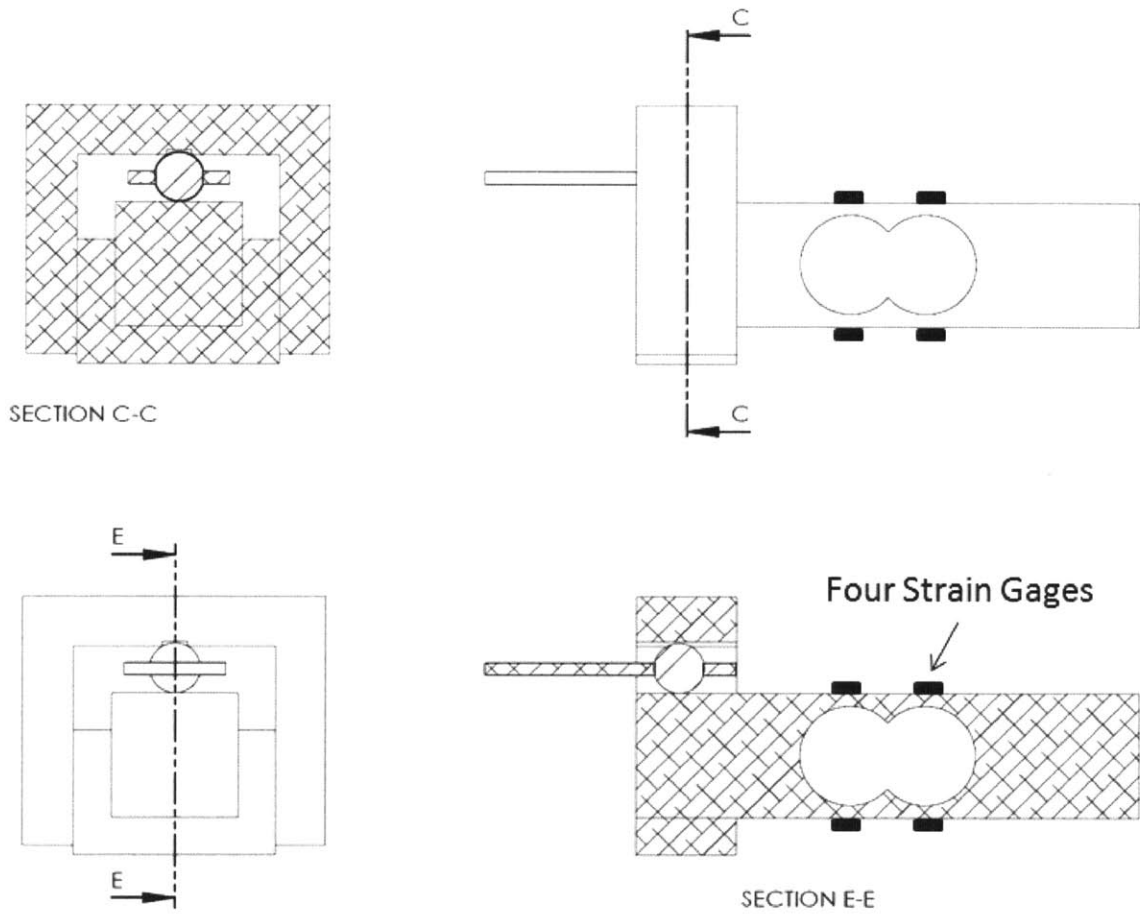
cross-sectional view of the load cell and ball joint assembly. The ball joint has one point contact to the lower surface and two point contacts to the upper surface.
